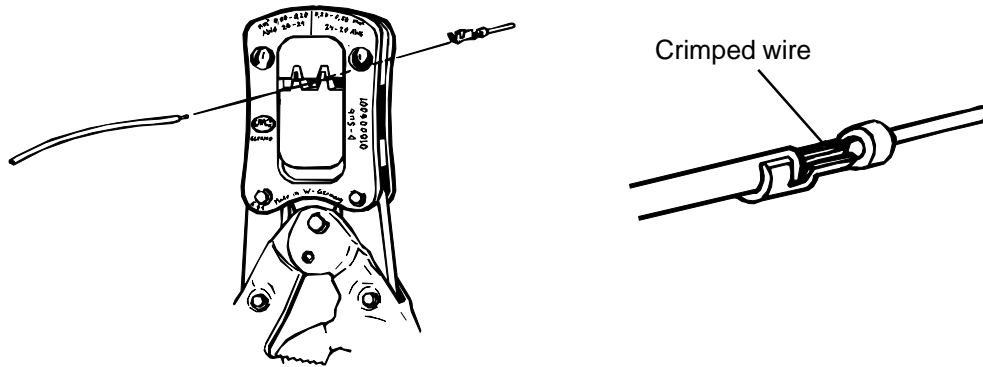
Crimping of wire (crimp tool LSD 319 11).
